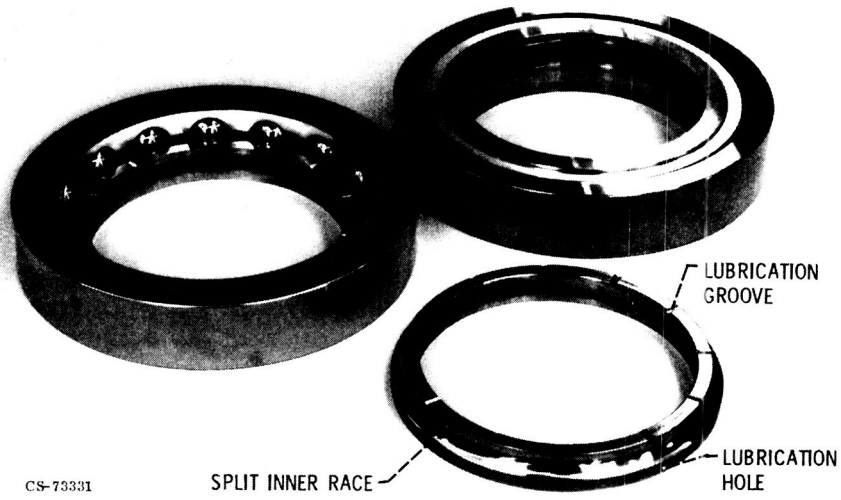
120-Millimeter-bore high-speed ball bearings.
